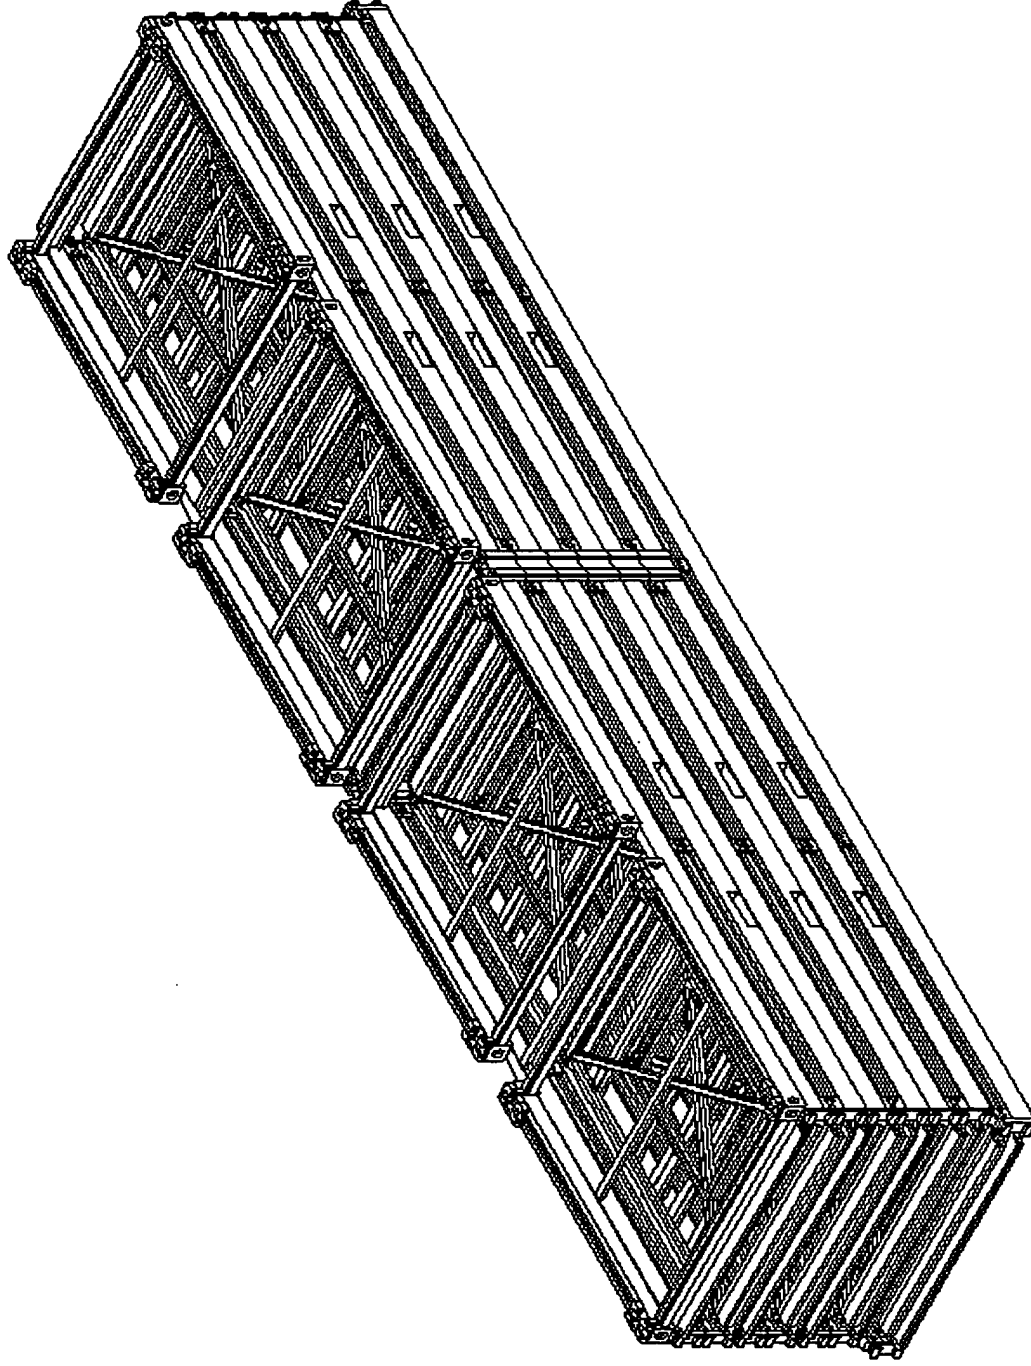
C: Step5 of disassemble and load process: The left and right frames from 2 disassembled 20 foot collapsible cargo containers are stacked on top of the previous assembly.
